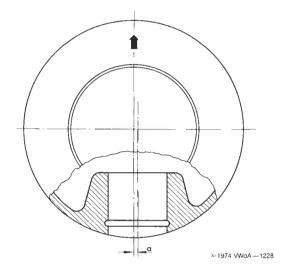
Piston pin offset. Arrow must point toward flywheel to position offset properly. Dimension a is 1.50 mm (.059 in.) on single-carburetor engines and 0.50 mm (.020 in.) on dual-carburetor and fuel injection engines.
